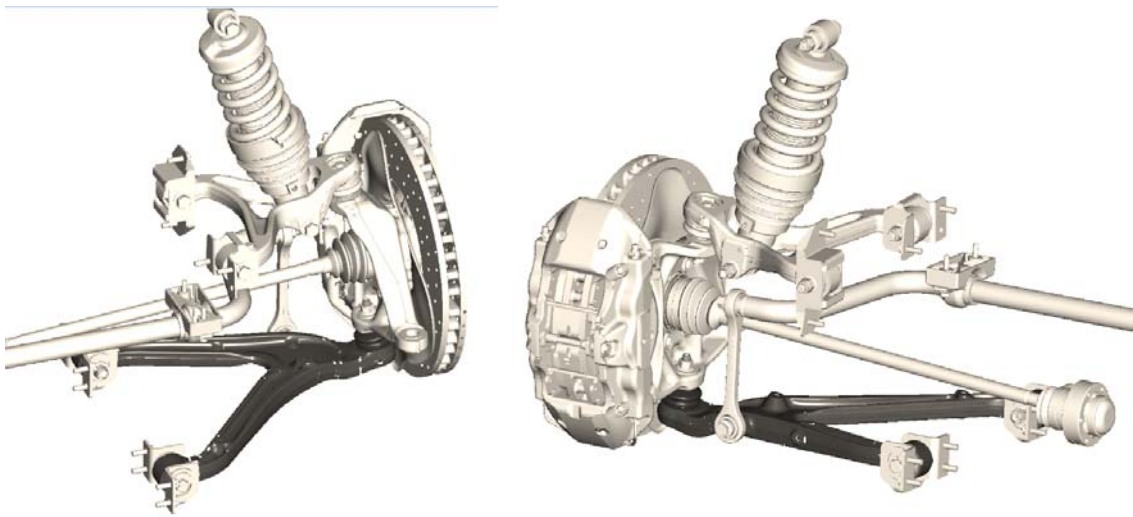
Two views of the wheel assembly showing front lower and upper control arms.
